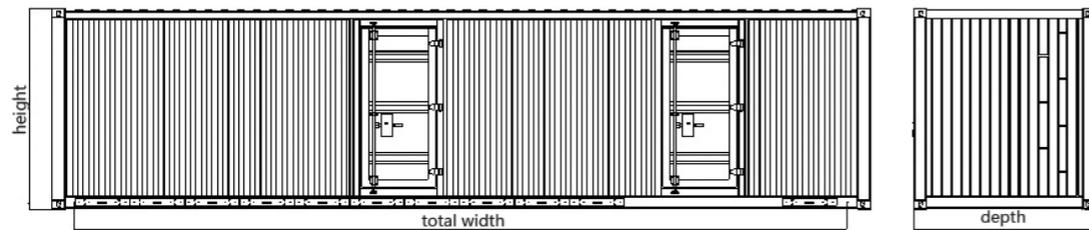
Dimensional Drawing of G40-35kV-Outdoor-Air Cooling FGSVG-C10/35-O
